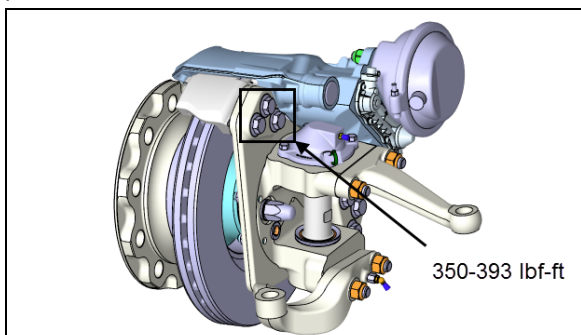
CALIPER CARRIER MOUNTING BOLTS TORQUE SPECIFICATION - I-BEAM AXLE
